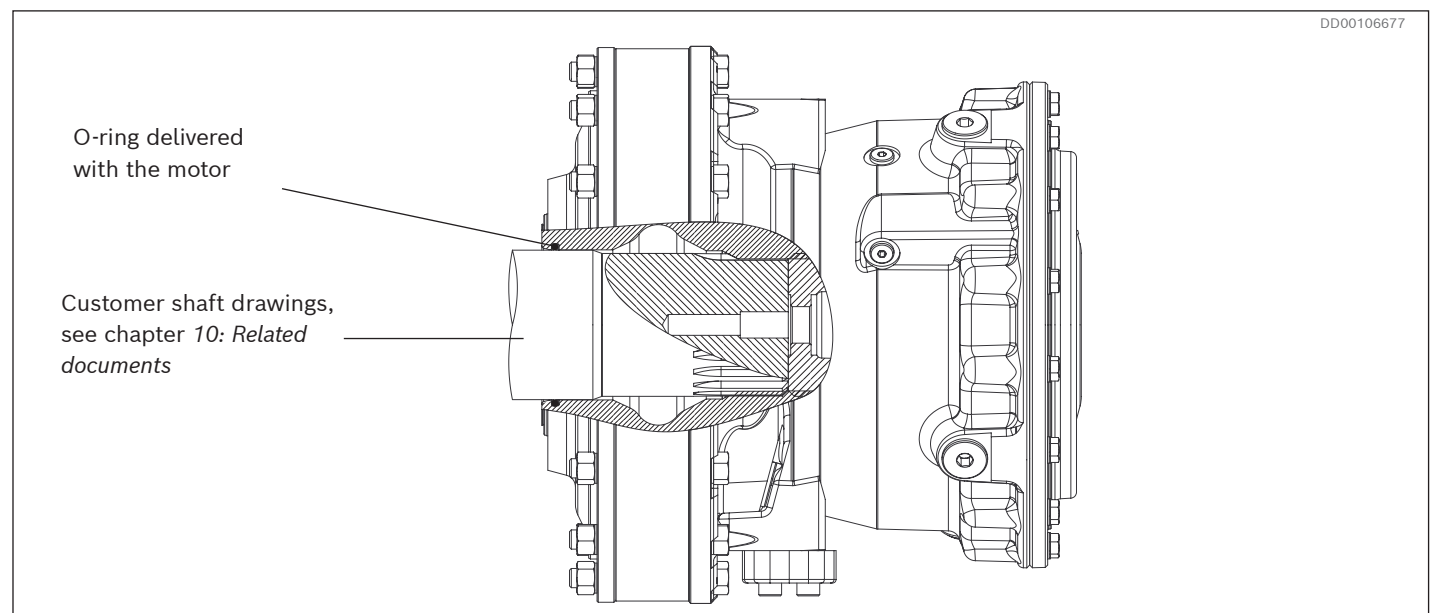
Example flange mounted CA motor with spline and MDA brake on customer shaft
